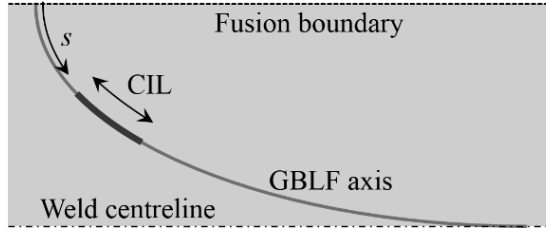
Schematic representation of the CIL of a GBLF. The welding direction is from left to right. The GBLF axis shown is located between columnar grains that extend from the fusion boundary and aligns with the weld centerline. The GBLF axis shown is located close the weld surface.
